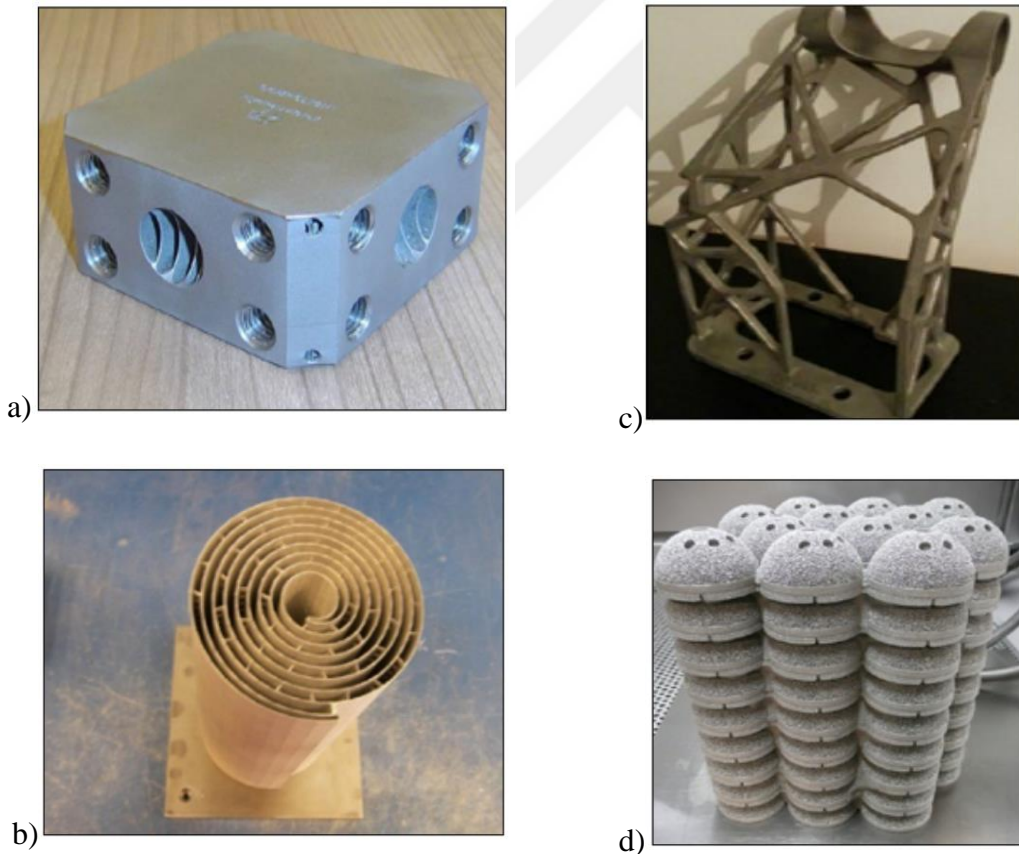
(a) Hydraulic prototype, (b) LBM fabricated Prototype, (c) Support of satellite, (d) Ti6Al4V implant with particular surface design.
